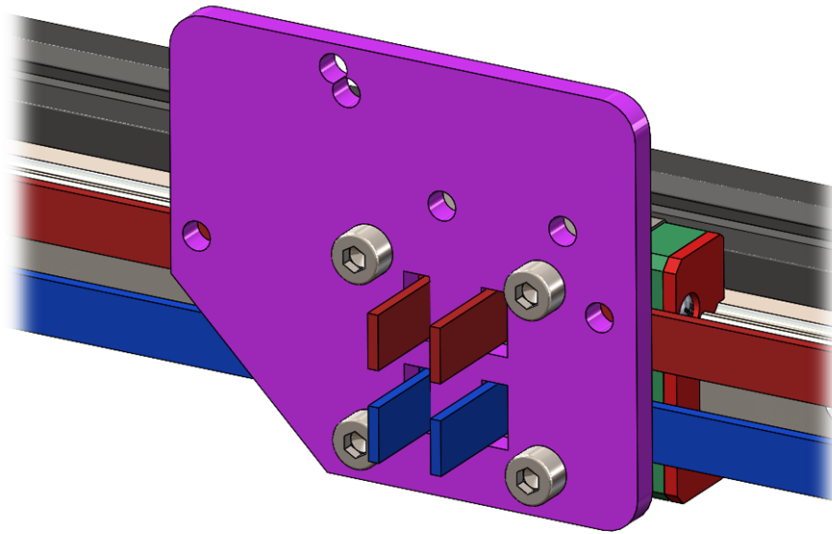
Secure belts using P10 bracket, adjust M3x8 Screws
